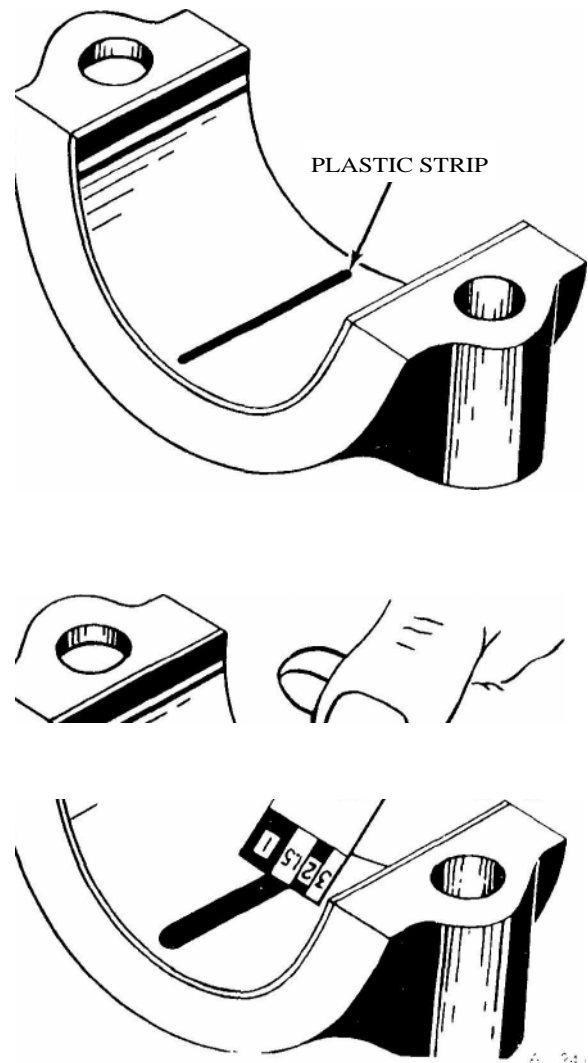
Using plastic strip to measure bearing-to-crankshaft clearance.
